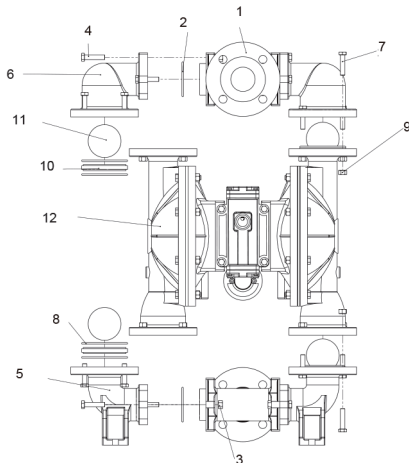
Disassembly of Inlet/Outlet进出口拆卸
